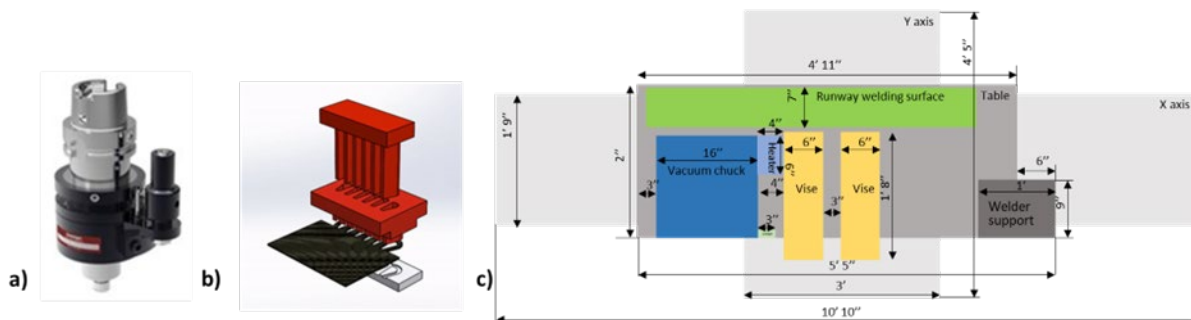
UAM process modifications: (a) the spindle-speed increaser, (b) the fiber alignment device, and (c) the runway welding surface. Source: The Ohio State University.
